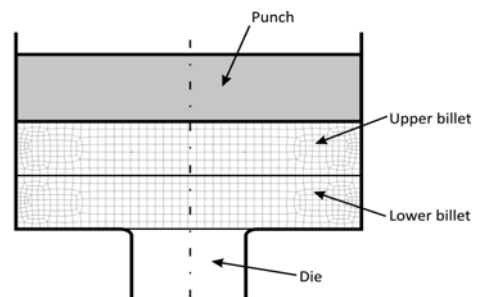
Cylindrical billets joined while forward extruding with using a flat punch
